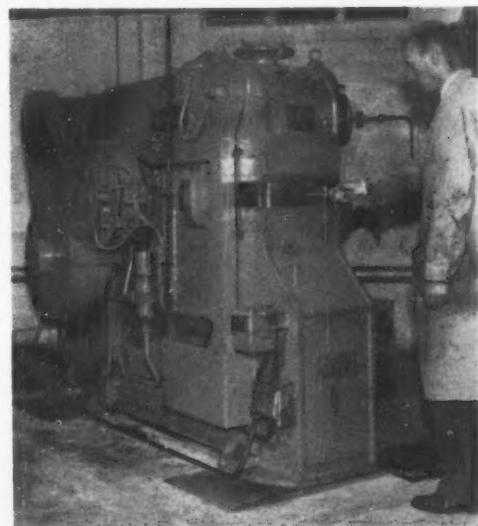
After being heated, the stainless-steel billets are hot-forged in this Eumuco split-die press
